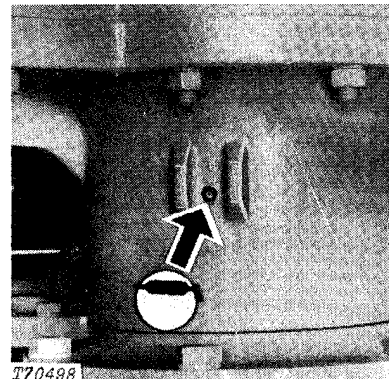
Right Feed Roll Final Drive Main Housing Pivot (1 Point)
